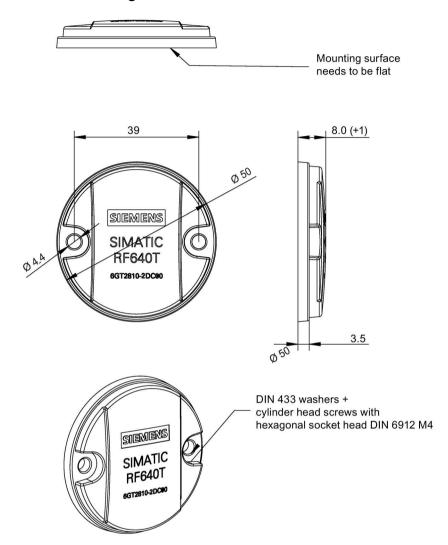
SIMATIC RF640T Gen 2 UHF Tool Tag Version 1
